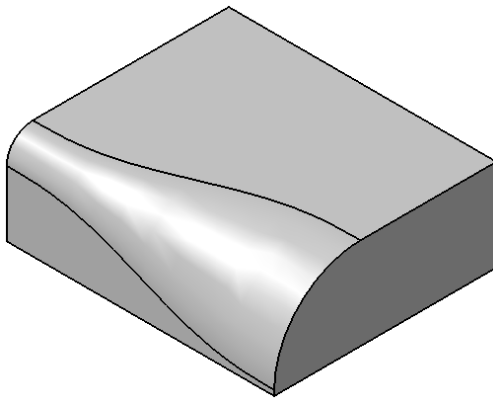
Variable radius fillet created by specifying radii at the two endpoints of the edge
